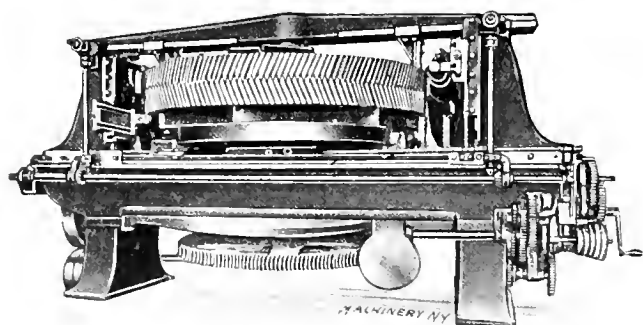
Machine for Cutting Solid Herring-bone Gears by the Wust Process.
